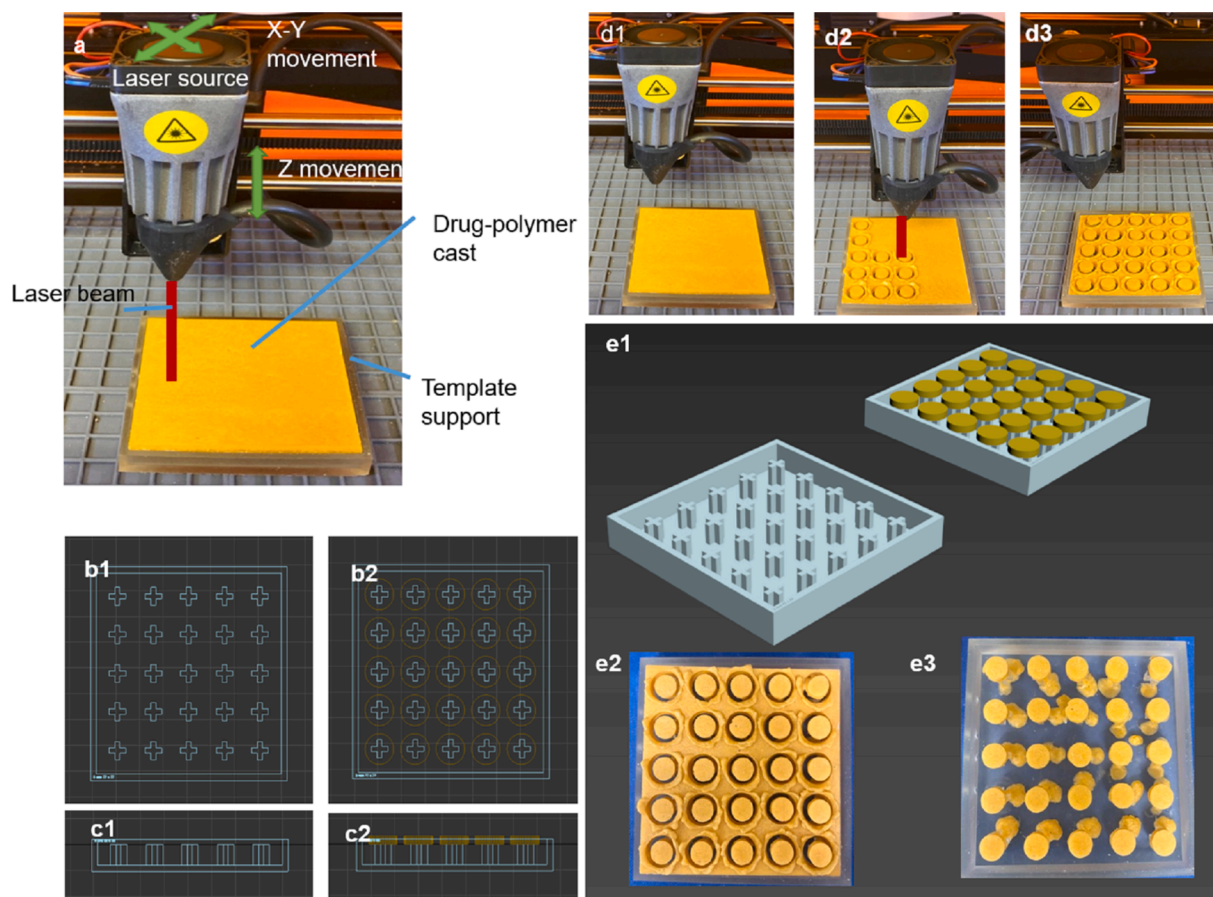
(a) The setup of the laser cutting station: a specially made drug-polymer cast (workpiece) is placed in 3D printed template holder. The setup is enclosed in a confined chamber equipped with high-performance filtration unit. (b1, b2) Top and (c1, c2) side views of 3D printed template to support the polymeric casts during laser cutting process, each tablet will be supported by a cross-shaped piston that allows the discharge of the molten casts. Yellow circles show the position of the tablets (b2, c2). (d1-d3) Steps of laser cutting process of furosemide loaded cast: (d1) setting origin (starting point); (d2) tablets cutting; (d3) the end of the cutting process. (e1) Rendered image of blank support template and following laser cutting. Batch of laser-cut the ablets placed in the supporting template: (e2) before and (e3) after removal of out-cut frame. (For interpretation of the references to colour in this figure legend, the reader is referred to the web version of this article.)
